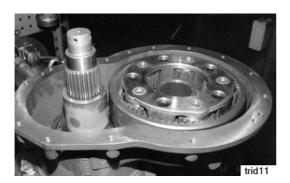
Pressing of planetary carrier cover. Note shims (A) on top of the gears.
